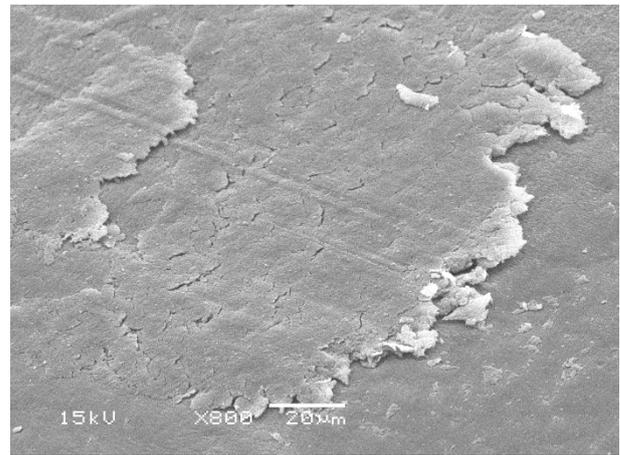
Smearing of Gear Flanks  $6 \times 10^6$  Cycles
